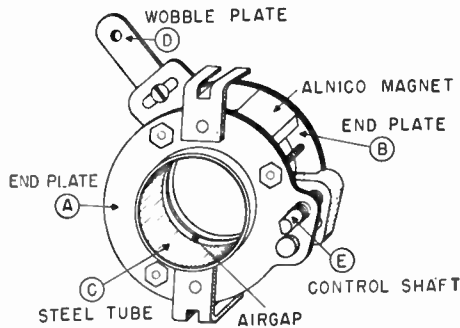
A combined centering and focus adjustment assembly. Centering is adjusted by means of wobble plate *D*. Focus is adjusted by turning shaft *E
